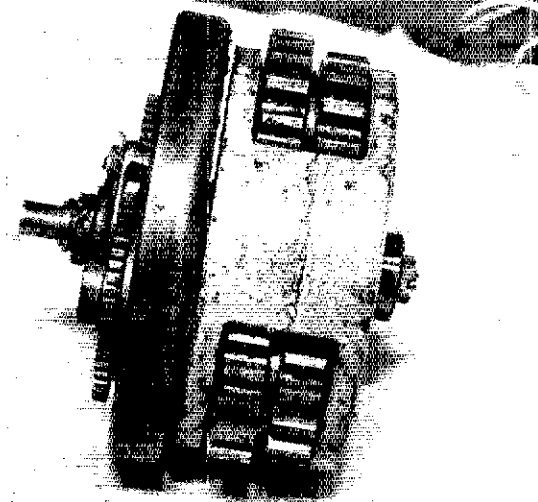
This is the gear-housing section -- the heart of the rotator.
